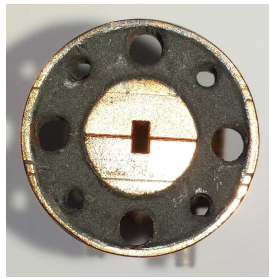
SLA printed waveguide flange with conducting compound filler.
